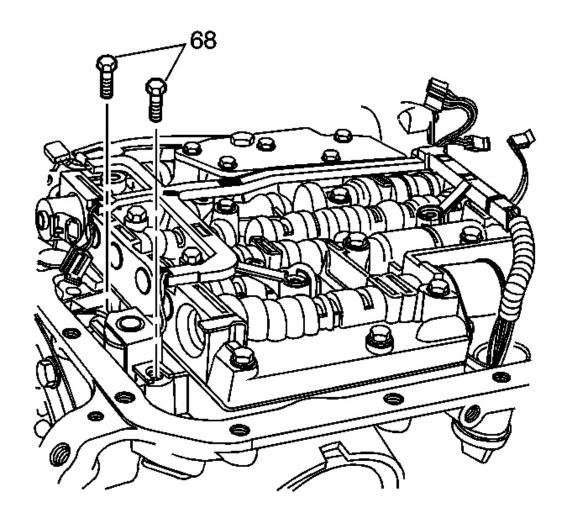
View Of TCC/PWM Solenoid & Clip Courtesy of GENERAL MOTORS CORP.
